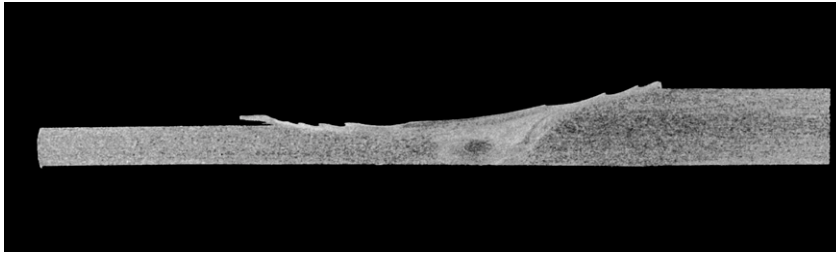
1 mm to 2 mm 6111-T4 Dissimilar Thickness Butt Weld
